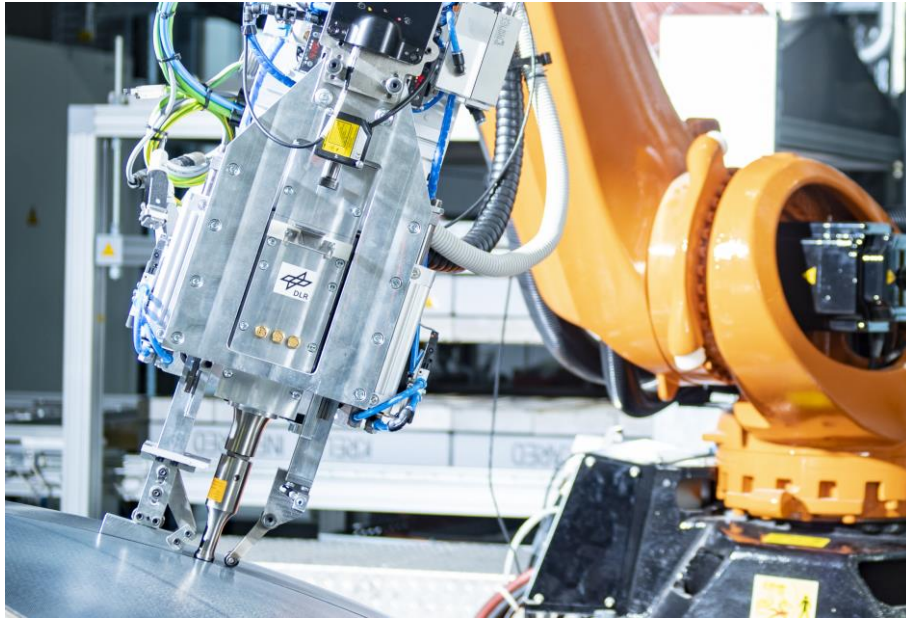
continuous ultrasonic welding process for joining long and not just straightforward appeared weld lines
